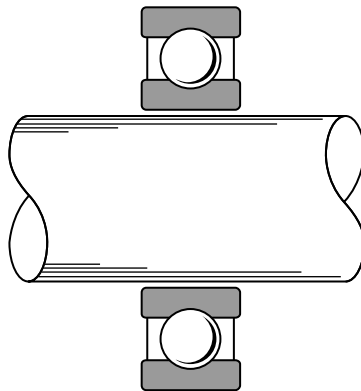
Example of typical fretting corrosion location¹⁶
